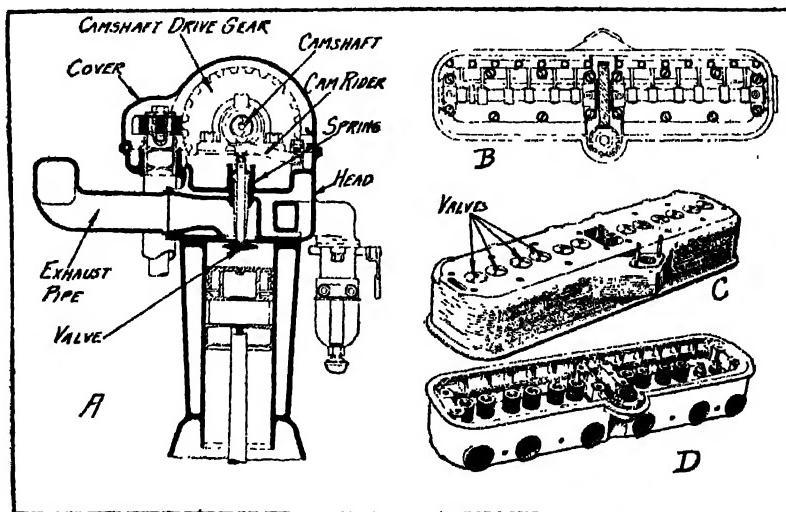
Sectional View Showing Construction of Premier-Weidely Overhead Valve, Detachable Cylinder Head Motor.
